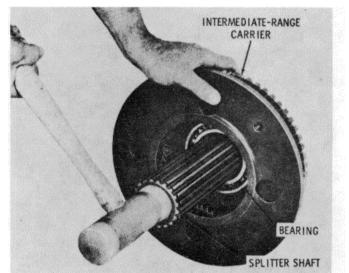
Removing Splitter Output Shaft Assembly from Intermediate Range Carrier
